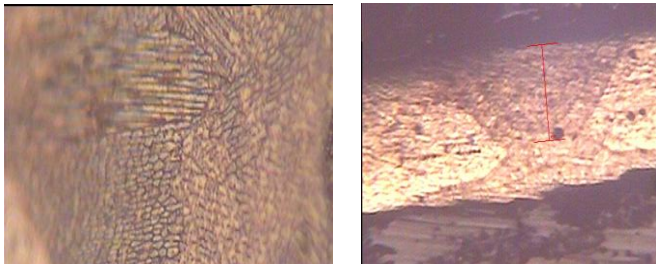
“(Weld zone microstructure)” and “(weld bead geometry dimensions)”
